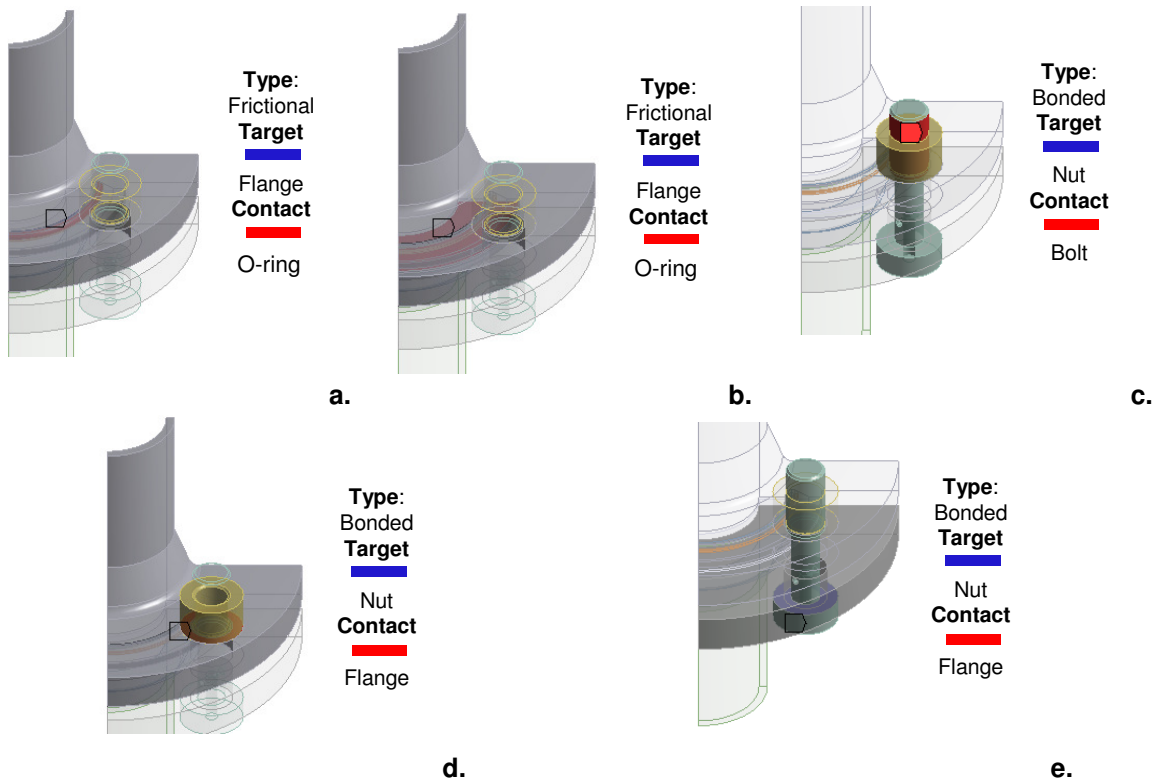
Contact interface between: (a) O-ring and top flange, (b) O-ring and bottom flange, (c) nut and bolt, (d) bolt and top flange, and (e) nut and bottom flange for the raised face flange with an O-ring groove
